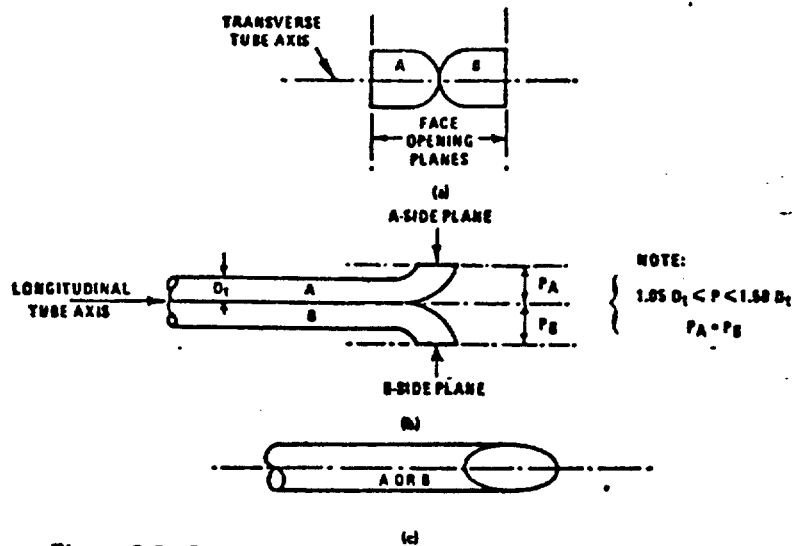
Properly constructed Type S pitot tube, shown in: (a) end view; face opening planes perpendicular to transverse axis; (b) top view; face opening planes parallel to longitudinal axis; (c) side view; both legs of equal length and centerlines coincident, when viewed from both sides. Baseline coefficient values of 0.84 may be assigned to pitot tubes constructed this way.
